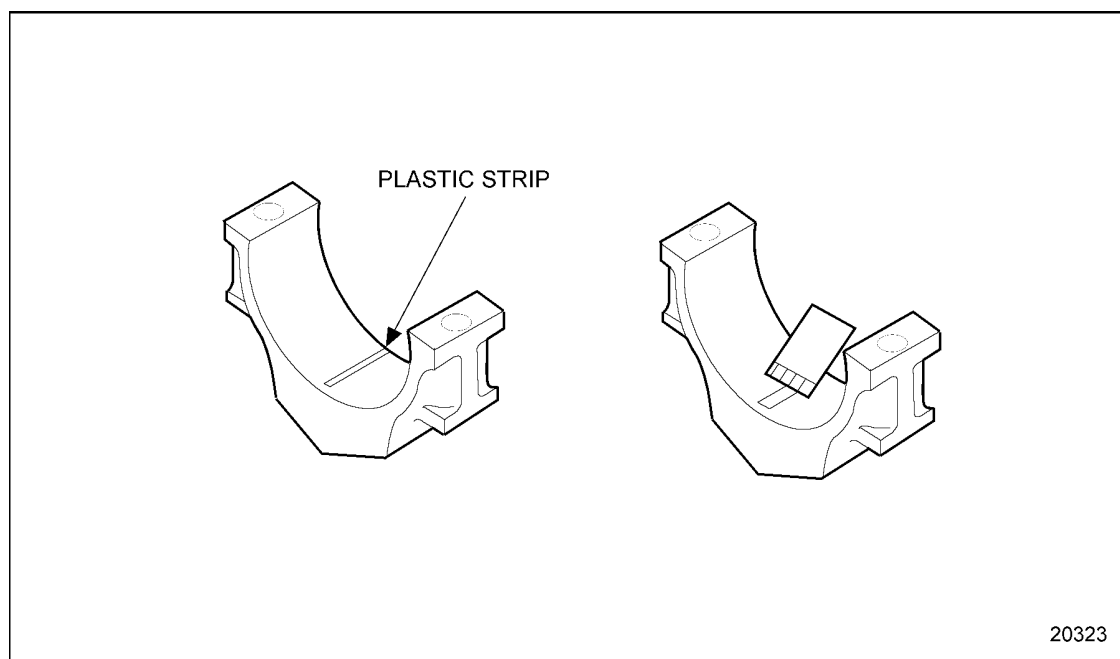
Using Plastic Strip to Measure Bearing-to-Crankshaft Clearance
